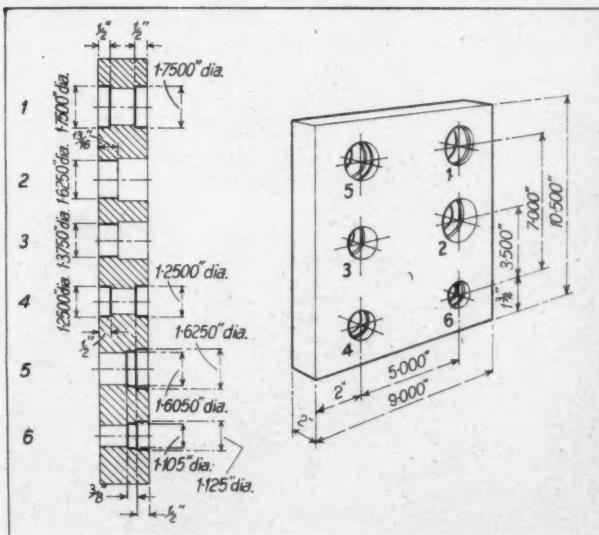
Sectional and perspective views of the test piece which is bored at the set-up on the Ex-Cell-O twin-head machine which is illustrated in Fig. 2
